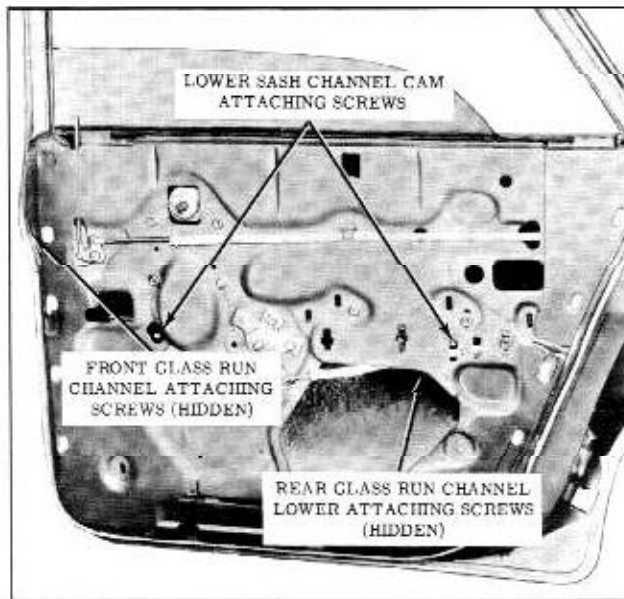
Rear Door Assembly ("35", "45" and "69" Styles)
